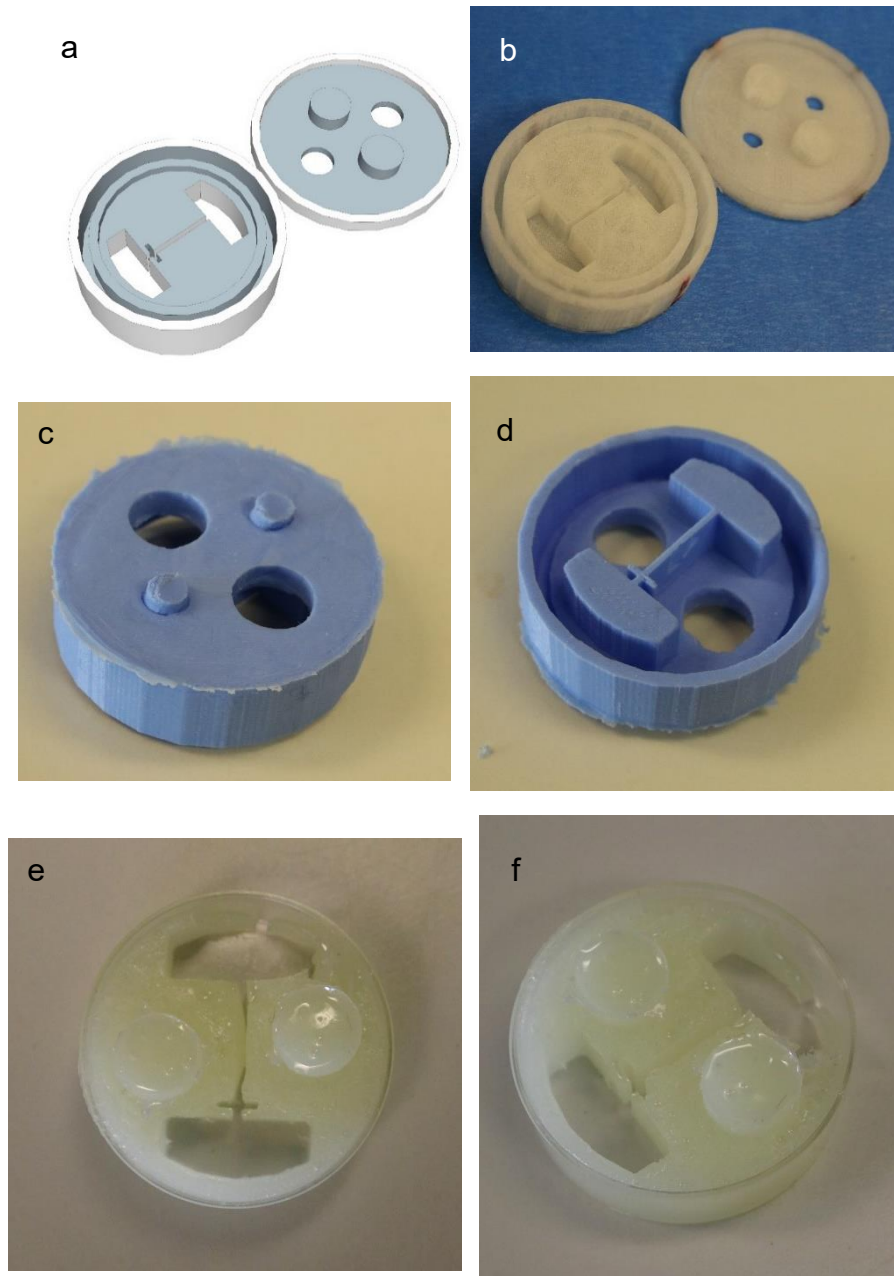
CAD for epoxy chemotaxis chambers, the 3D printed PLA mould, the silicone cast and the fast set epoxy chemotaxis chamber. a) CAD design created in Google Sketch Up (64 bit) 2017 for the epoxy chemotaxis chambers. b) 3D printed PLA mould printed using Ultimaker 3 extended. c) and d) The silicone cast created from the PLA mould. e) and f) The epoxy cast created using Araldite Rapid Epoxy from Huntsman Advanced Materials. Results representative of the production of 6 epoxy chemotaxis chambers.
